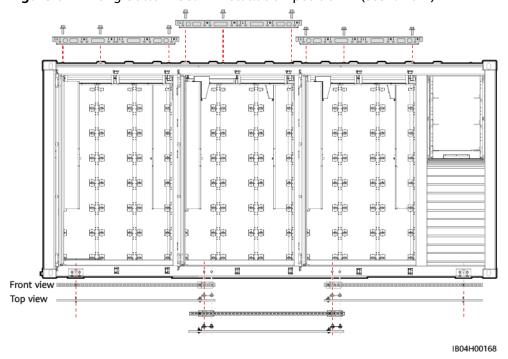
Long bottom beam installation position 2 (scenario 1)
